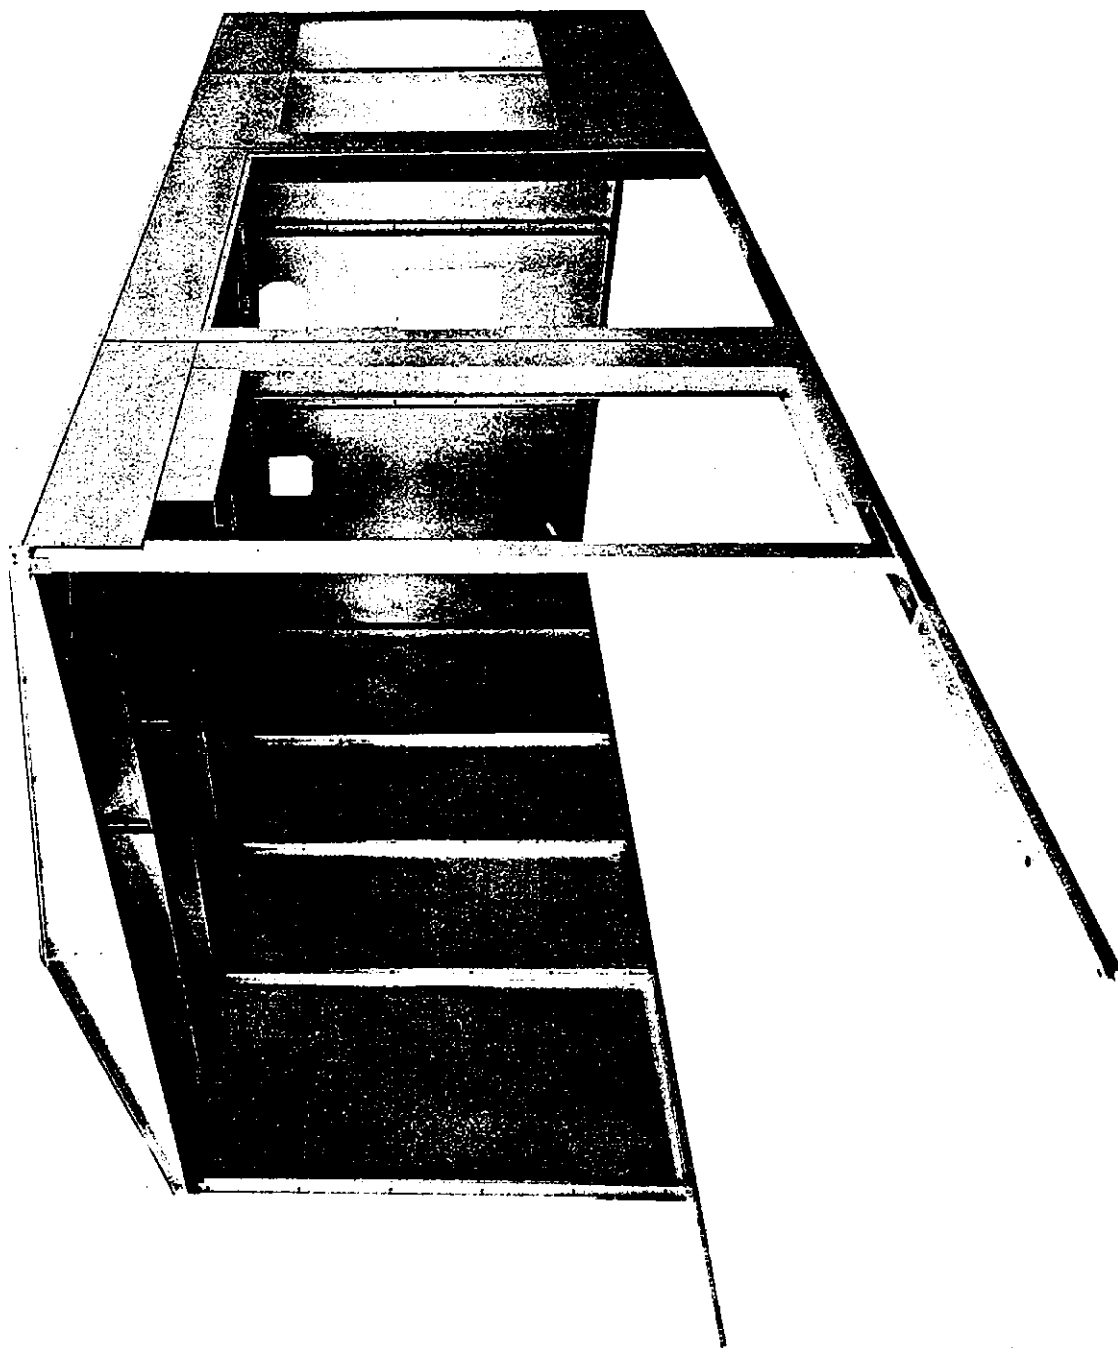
Enclosure, Partial Assembly, Control Panel, Front View
